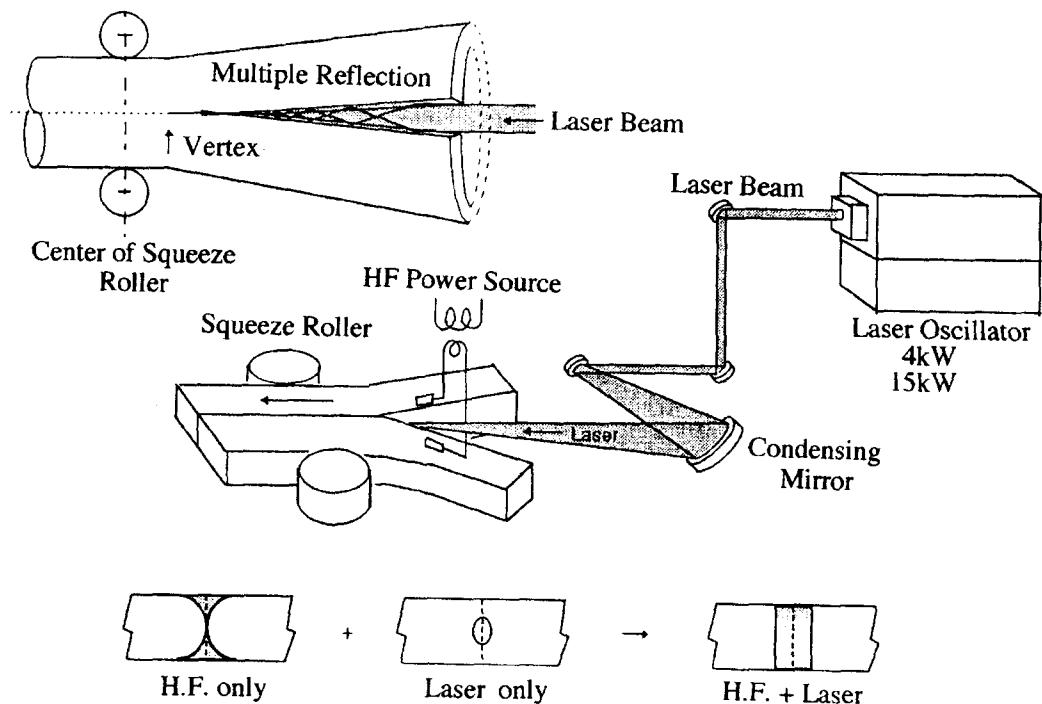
Combined HF and laser welding for production of pipe [8]
